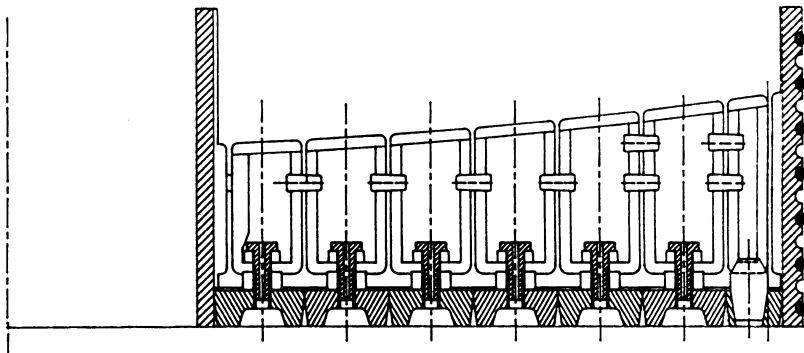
Radial cross section of the mold for the 3.5 m casting. Hard refractory pieces are hatched, and the inconel bands are shown solid.
